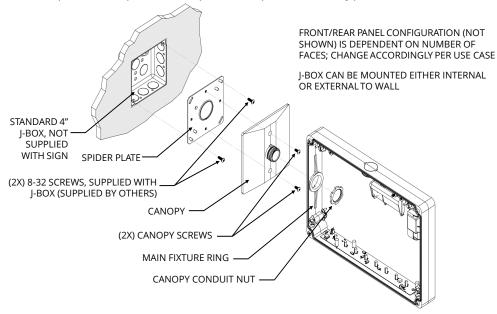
END MOUNT (SINGLE OR DOUBLE FACE)
